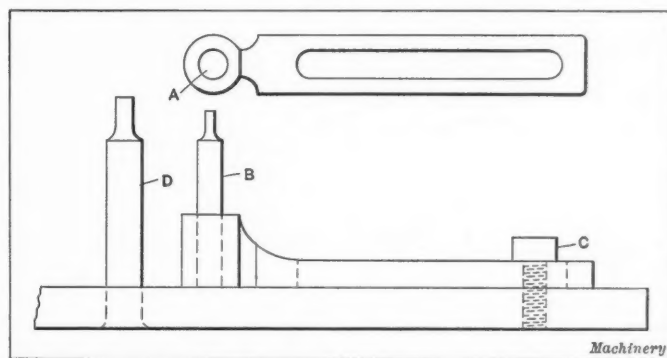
Transfer Gage for locating Holes in a Punch-pad
